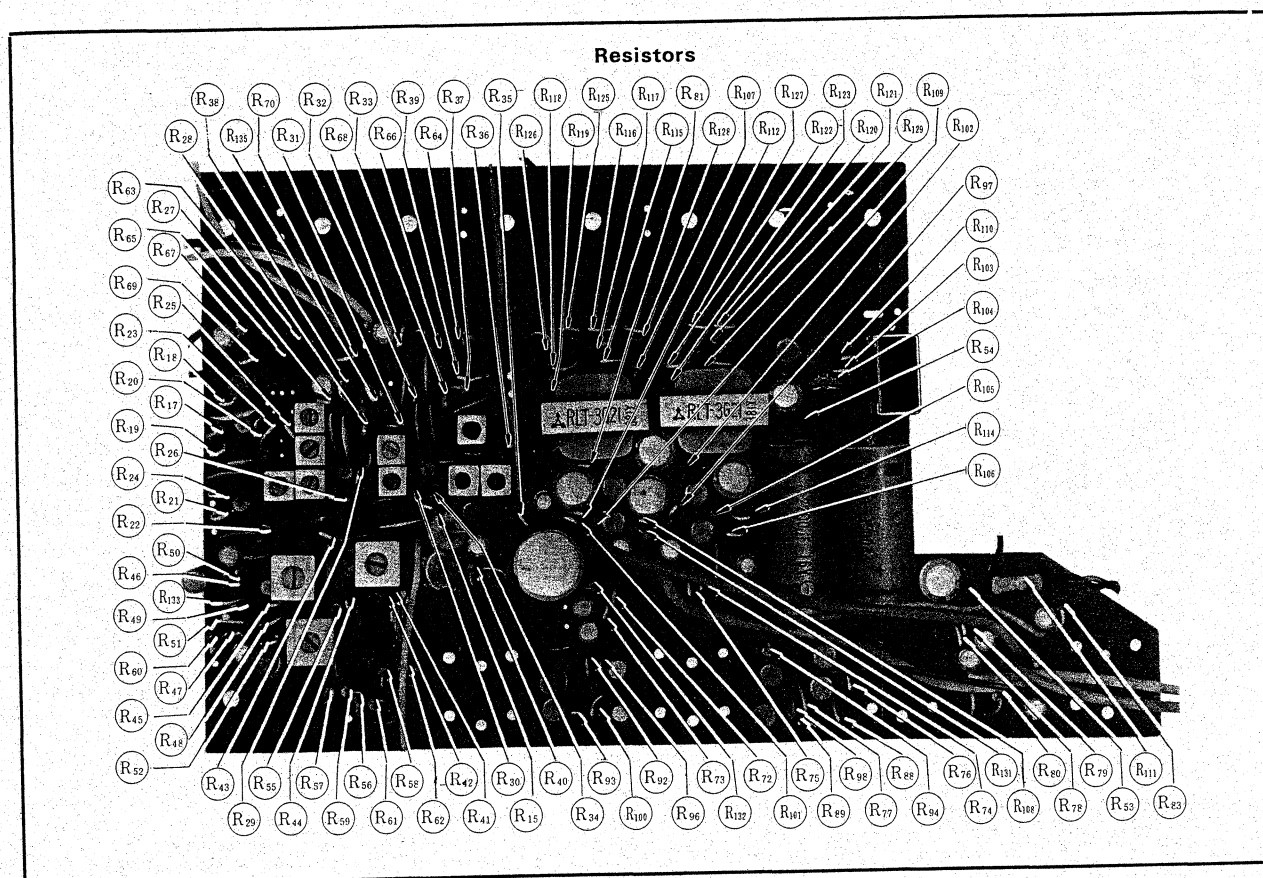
Component View—Parts Identification, IF, MPX & Audio Circuit
